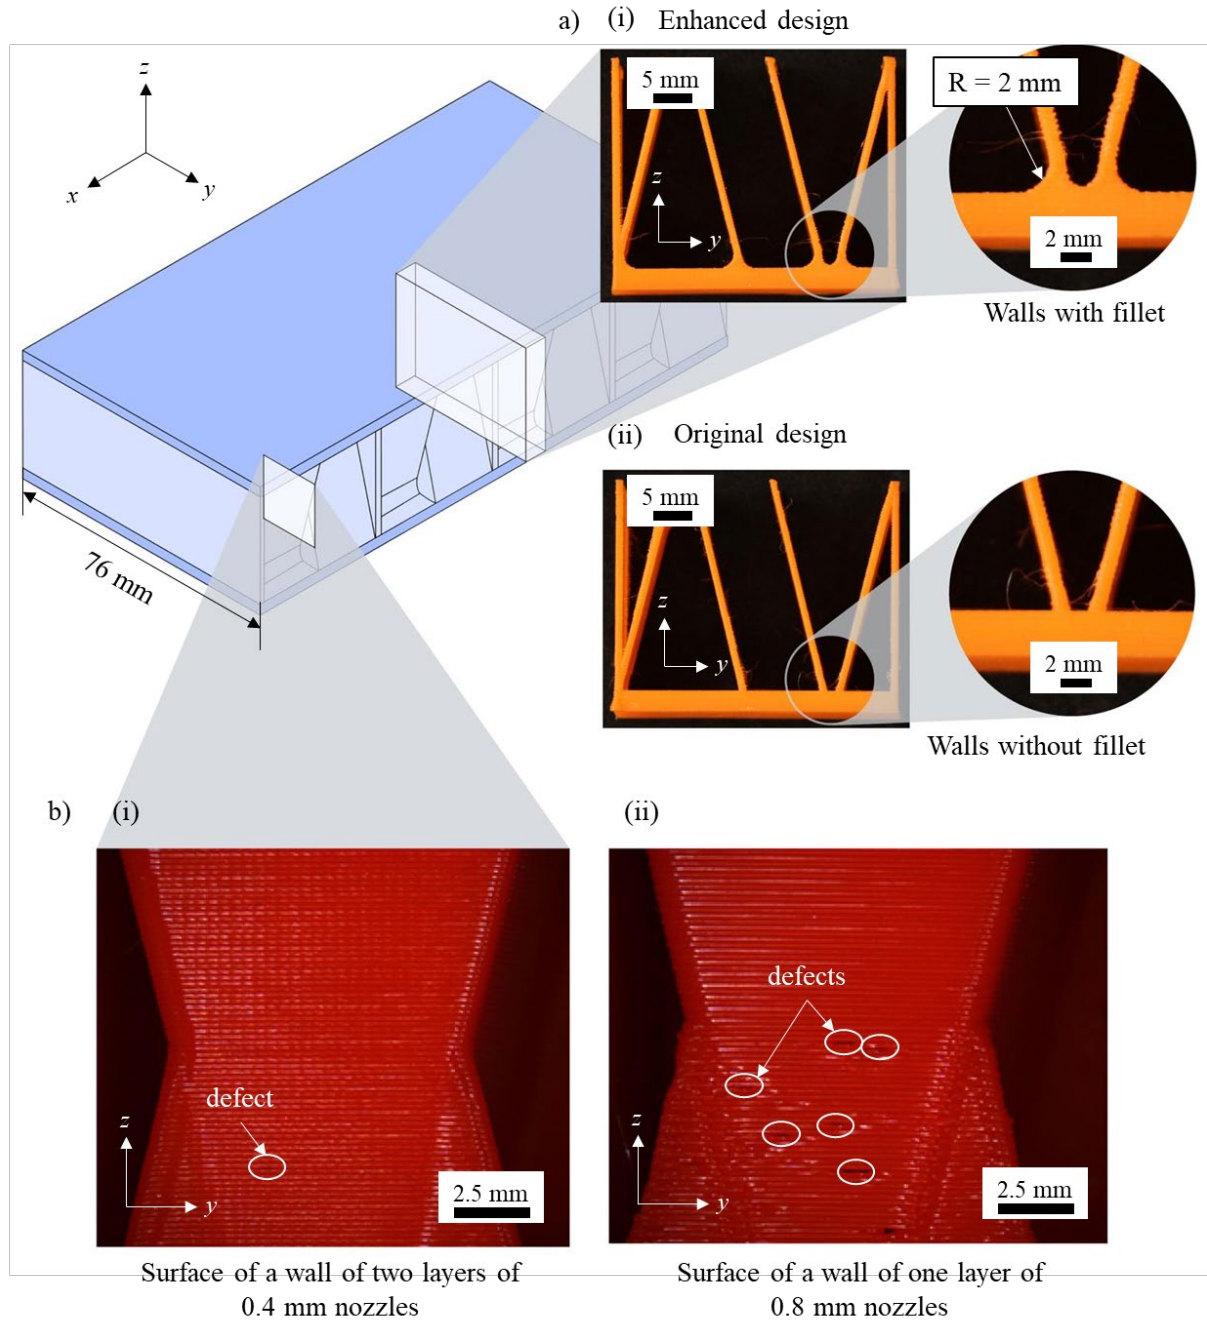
Visual inspection of wall sections of the TC panels, where fillets having a radius of 2 mm and printed with a nozzle having a diameter of 0.4 mm improve the printing quality: a) TC structure printed with and without fillets. b) Details of the surface of printed sections TC4×2 and TC8×1 where the section TC8×1 exhibits more printing defects than the section TC4×2.
